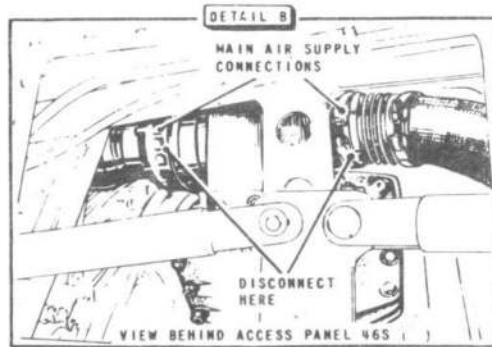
NO.1 E.C.U.-REMOVAL AND ASSEMBLY (2)
